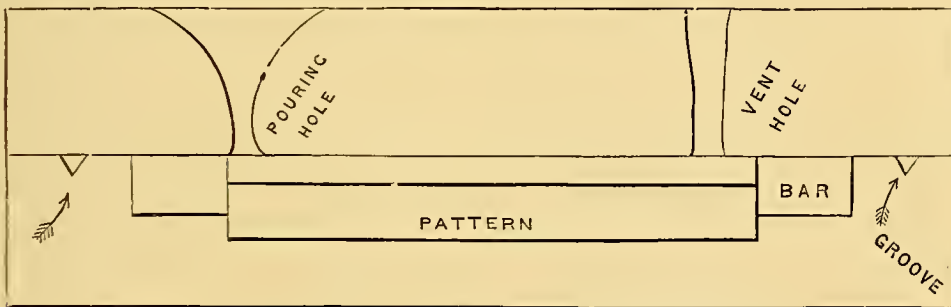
LONGITUDINAL SECTION OF MOULD WHEN COMPLETED.
